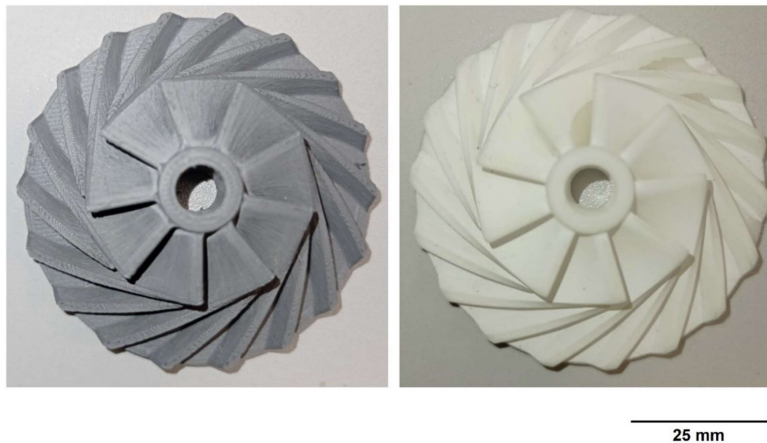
3D printed rotor (left: PPS by FFF and right: Rigid 10k by SLA)
